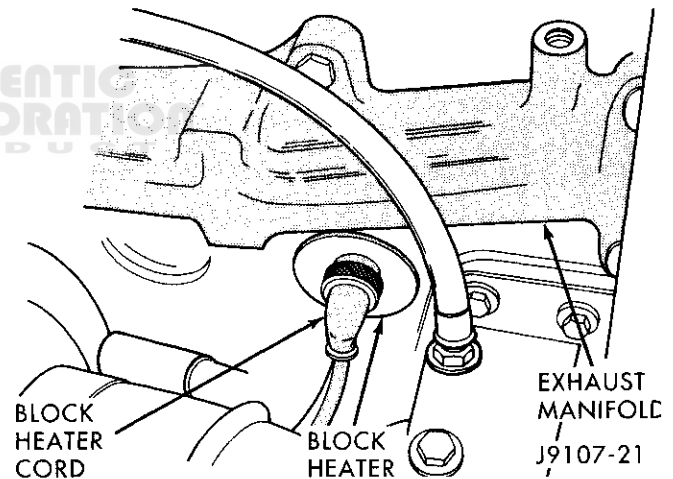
Engine Block Heater—5.9L Diesel Engine
